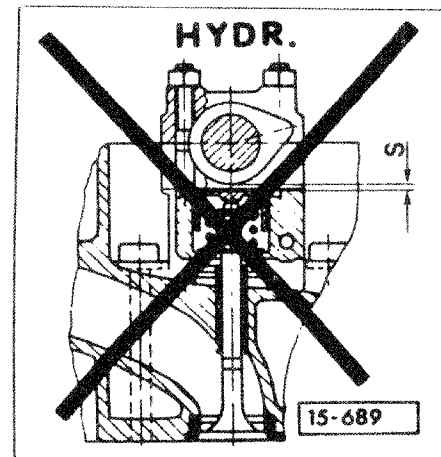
Label on cylinder head cover identifies engines with hydraulic cam followers that maintain proper valve clearance and do not require adjustment.
